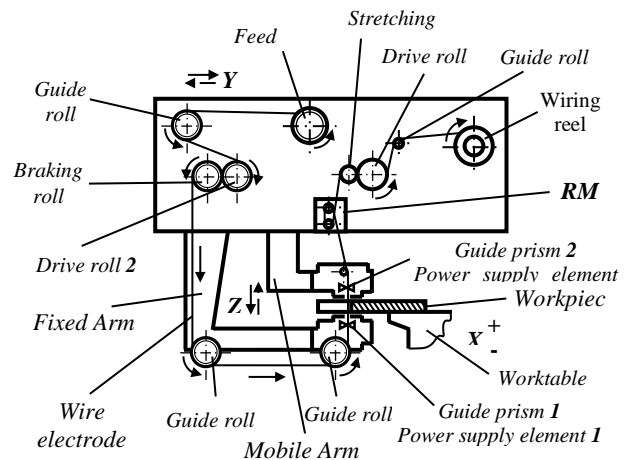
Scheme of the wire electrode drive mechanism of the ELEROFIL-10 machine
